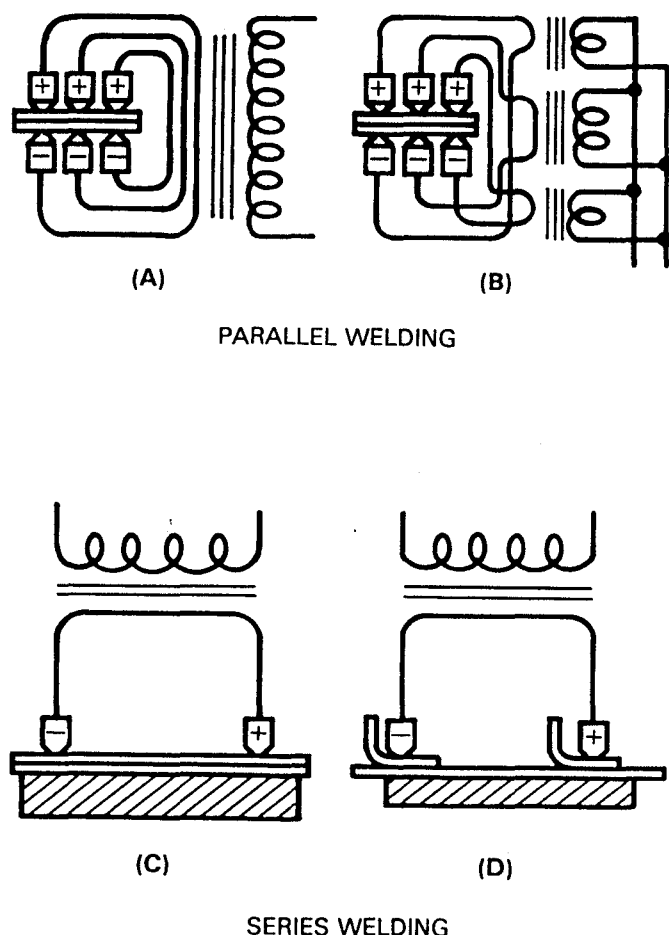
Typical Secondary Arrangements for Direct Multiple Spot Welding
